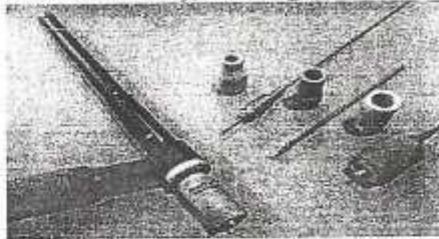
GTAW torch with various electrodes, cups, collets and gas diffusers
